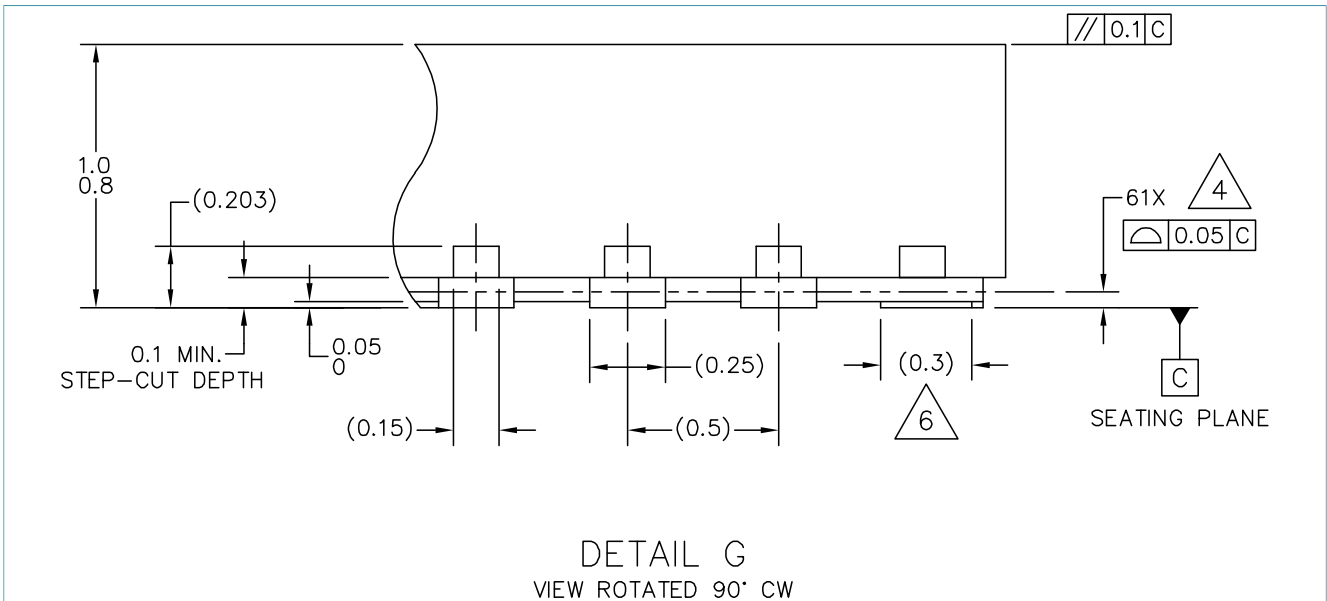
Package outline detail for HVQFN56 (SOT684-23)
